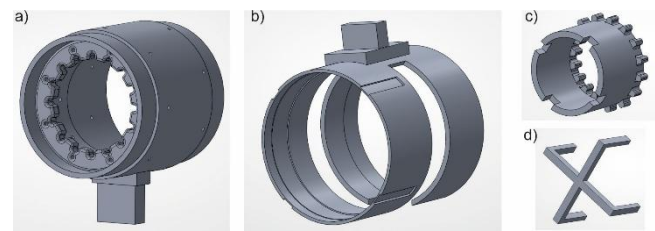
Basic joint components: a) inner sleeve, b) outer sleeve, c) coupling sleeve, d) cross-shaped coupling element
